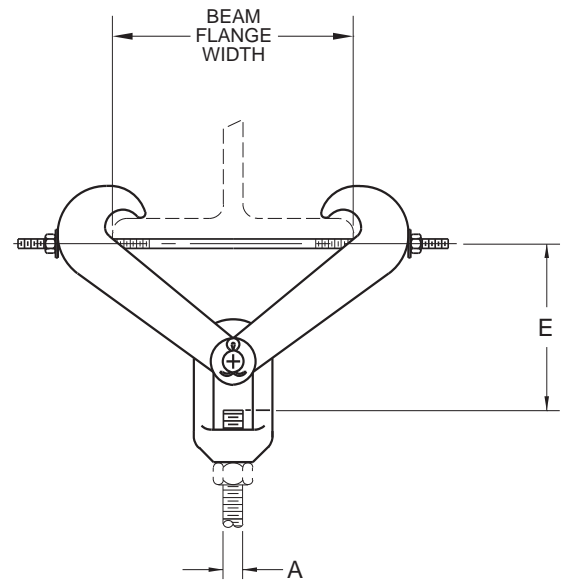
STEEL BEAM CLAMP WITH WELDLESS EYENUT
